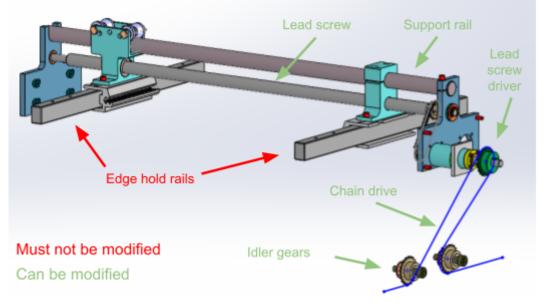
Labeled CAD of one lead screw adjustment mechanism, with parts that cannot be modified in red and parts that can be modified in green. This represents one out of four to seven lead screws in the oven, and they are coupled together by a transmission in the cold zone.
